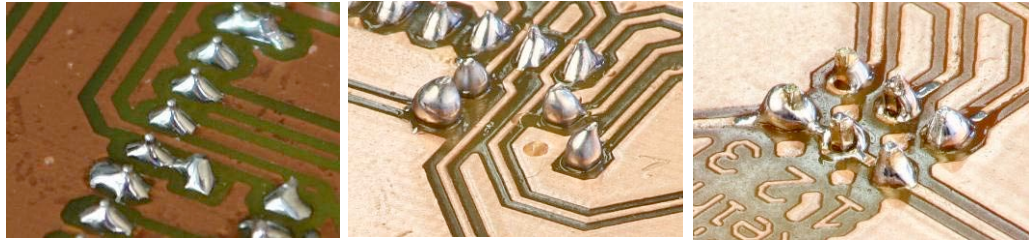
Good solder joints (*left*), cold joints (*center, in front*) and poor joints (*right*).¹
